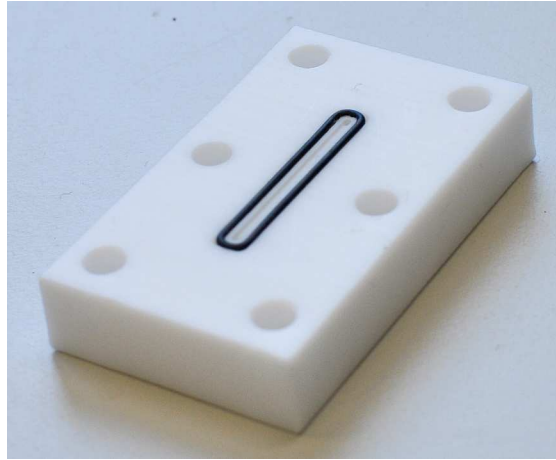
Top part of the teflon holder. The channel and the toric gasket can be observed.
